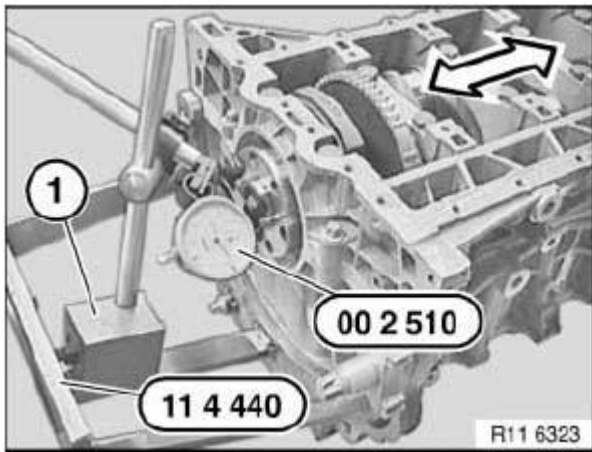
Identifying Special Tool (00 2 510) And (11 4 440)
